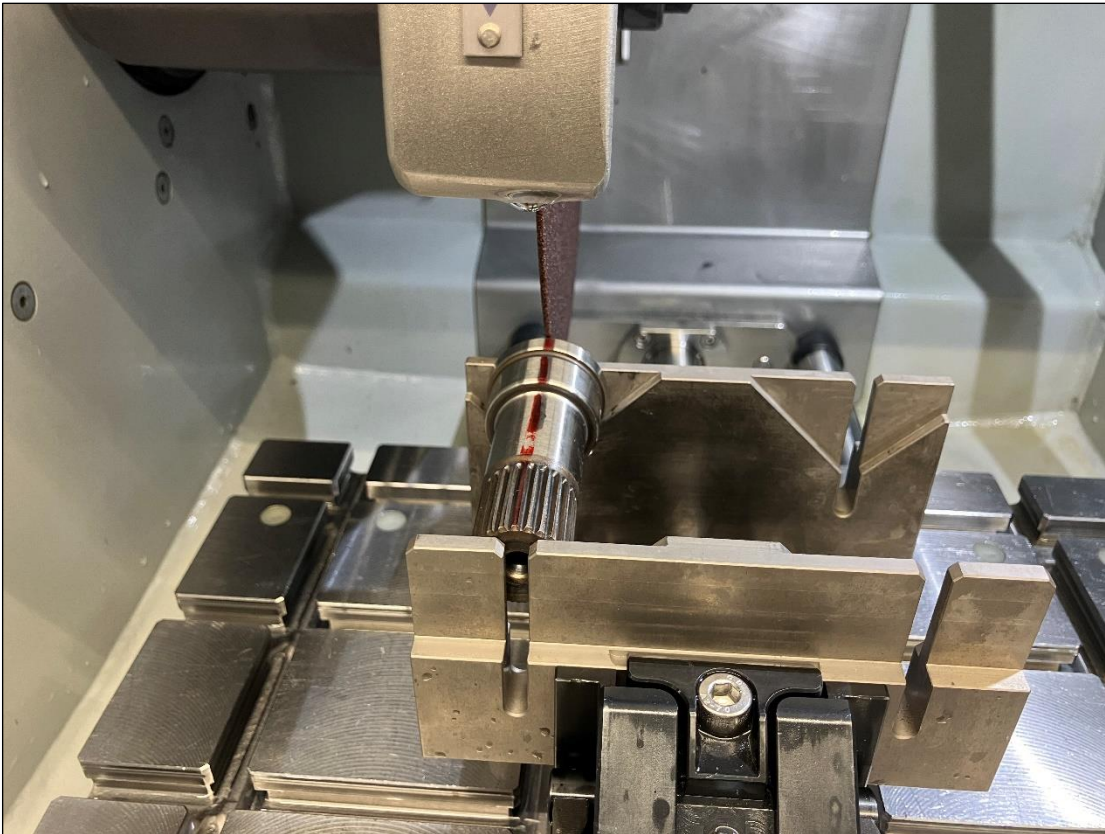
Cutting position 3 – BEFORE cutting process (Qtool 80 with 2x round bar jaw).
